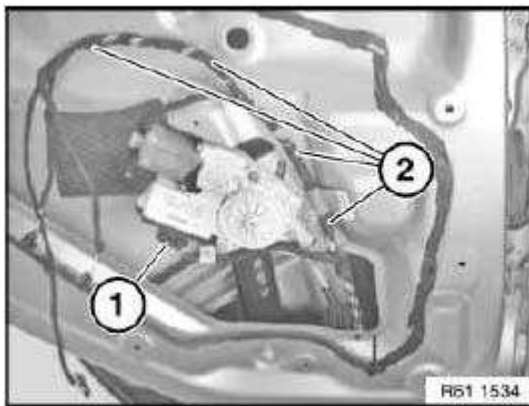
Identifying Plug Connection And Door Wiring Harness Points
